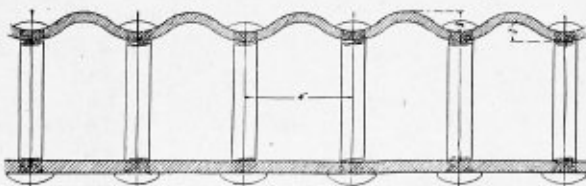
DETAILS OF CORRUGATED SIDE SHEET.
